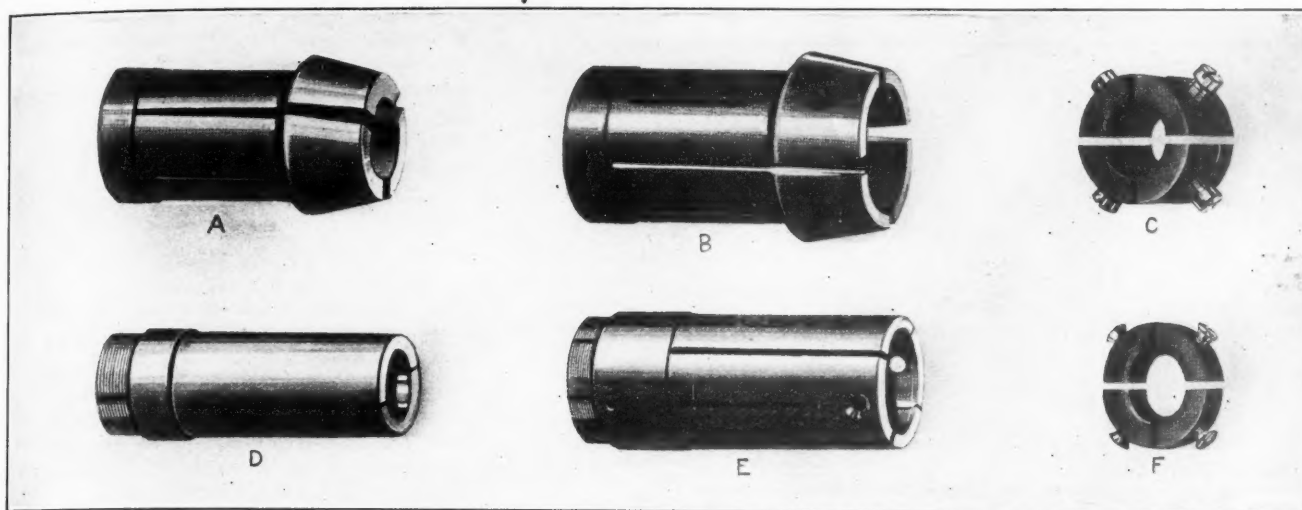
Standard Type of Spring Chucks and Feed Shells used in the Cleveland Automatic
